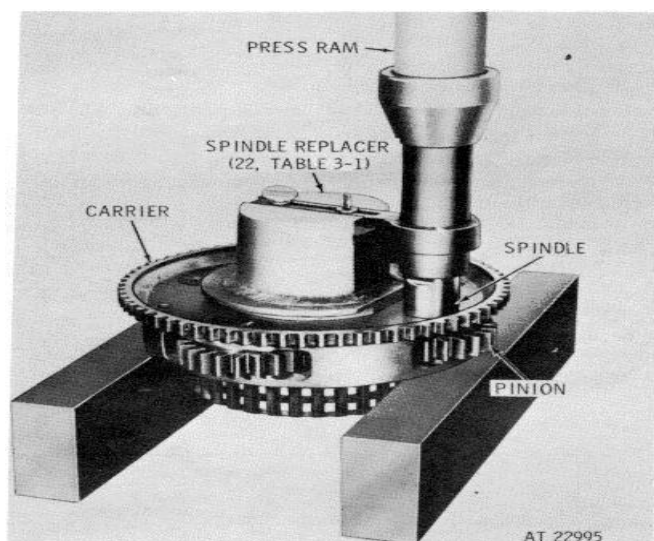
Installing spindle into intermediate-range planetary carrier.
